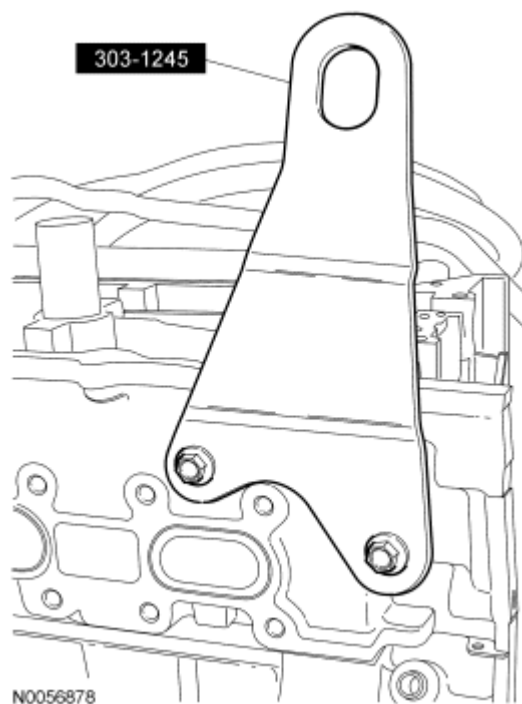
Installing Special Tool (303-1245) On LH Cylinder Head
